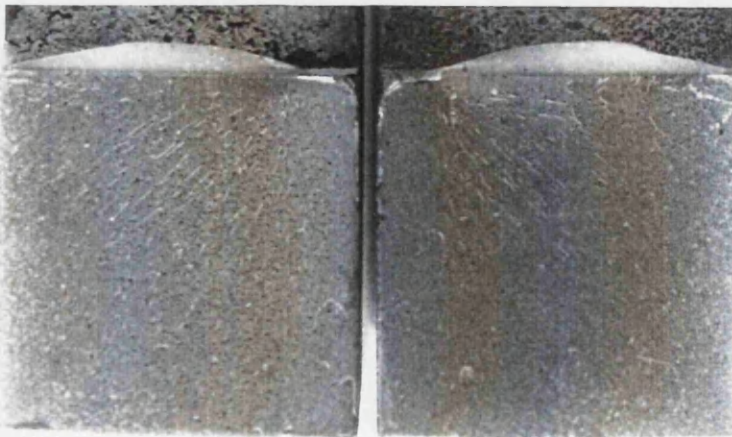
FRACTURED SURFACES OF TENSILE CLEAVAGE SPECIMEN (STEEL/STEEL)
